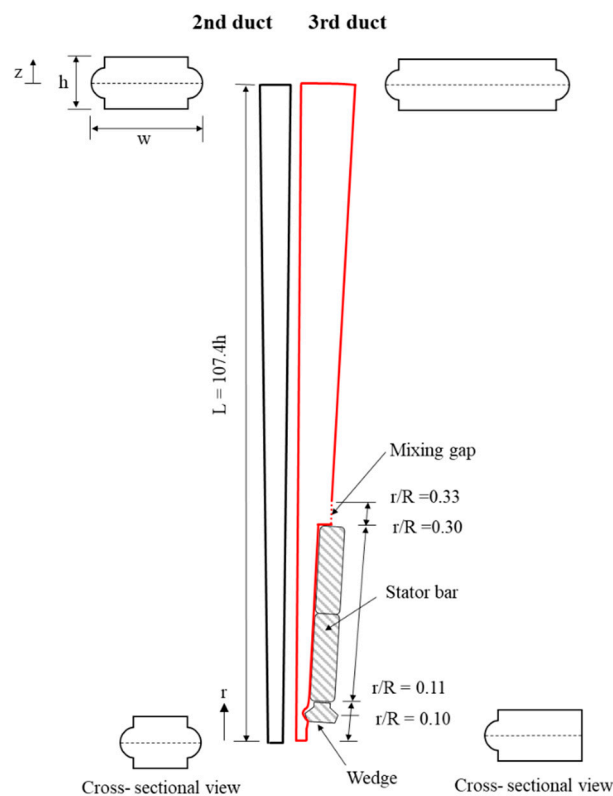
The geometrical details of the stator ventilation ducts (plane and cross-sectional views).
